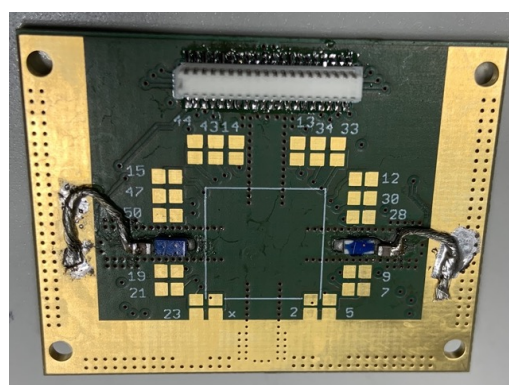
The version three PCB with extra capacitors and wires soldered to the ground plane.
